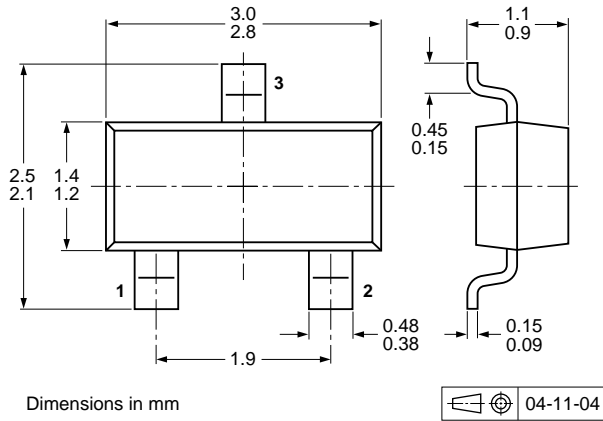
Package outline BAS16 (SOT23/TO-236AB)
